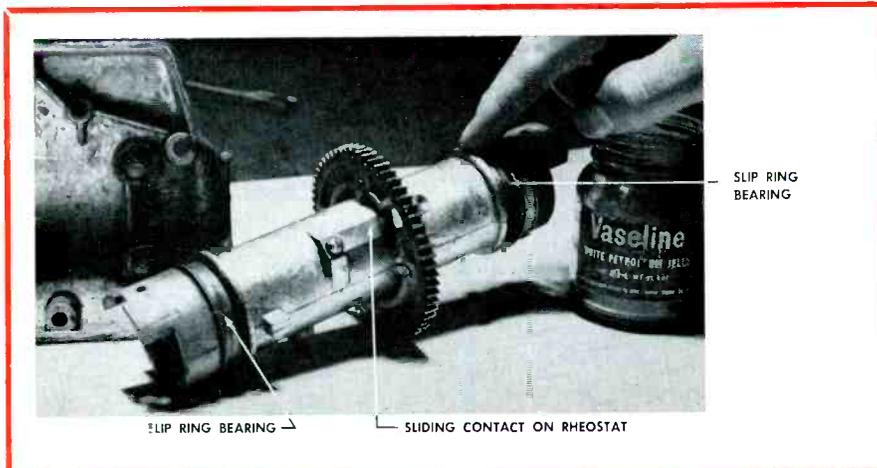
Remove all sticky grease with a brush and cleaning fluid and lubricate slip-rings and bearings with petrolatum.
